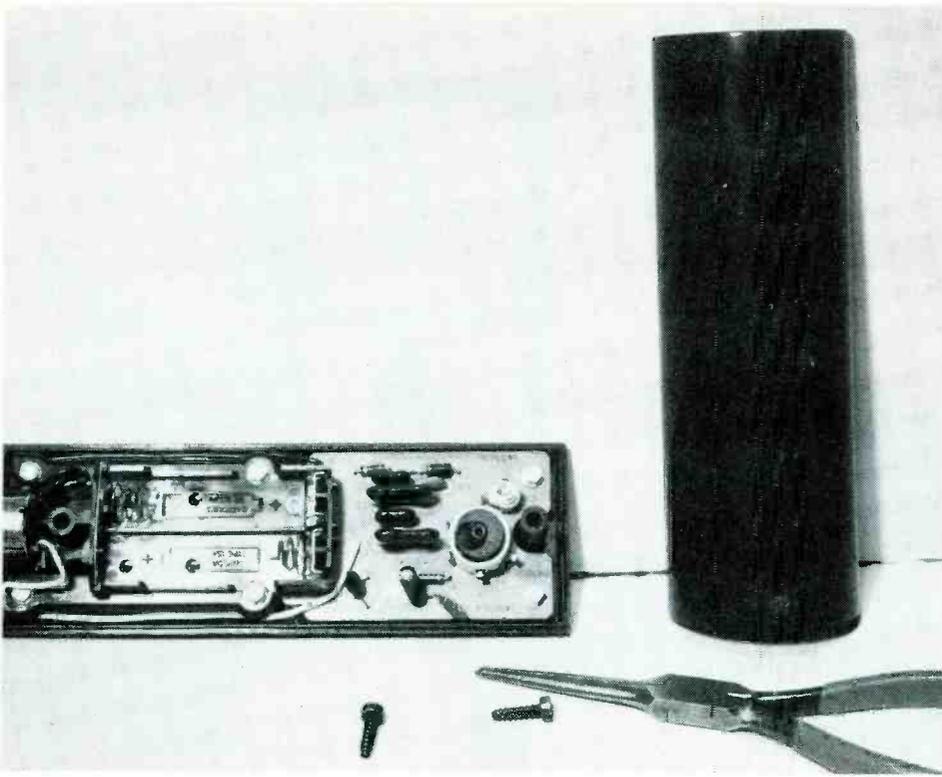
Some remote-control problems can be eliminated by checking the printed-circuit board for loose components or wires and broken printed-circuit board copper-traces. Loose parts and wires can easily be secured with a hot soldering iron and a bit of solder. Severed traces can be repaired by bridging the gap over cracks with #22 AWG wire.
